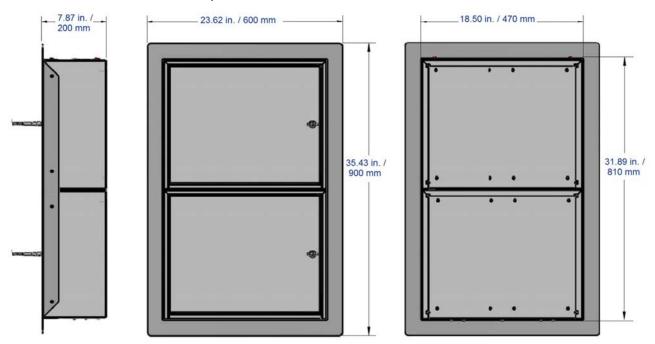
DOUBLE SK Enclosure Overall Dimensions with Decorative Trim Frame
